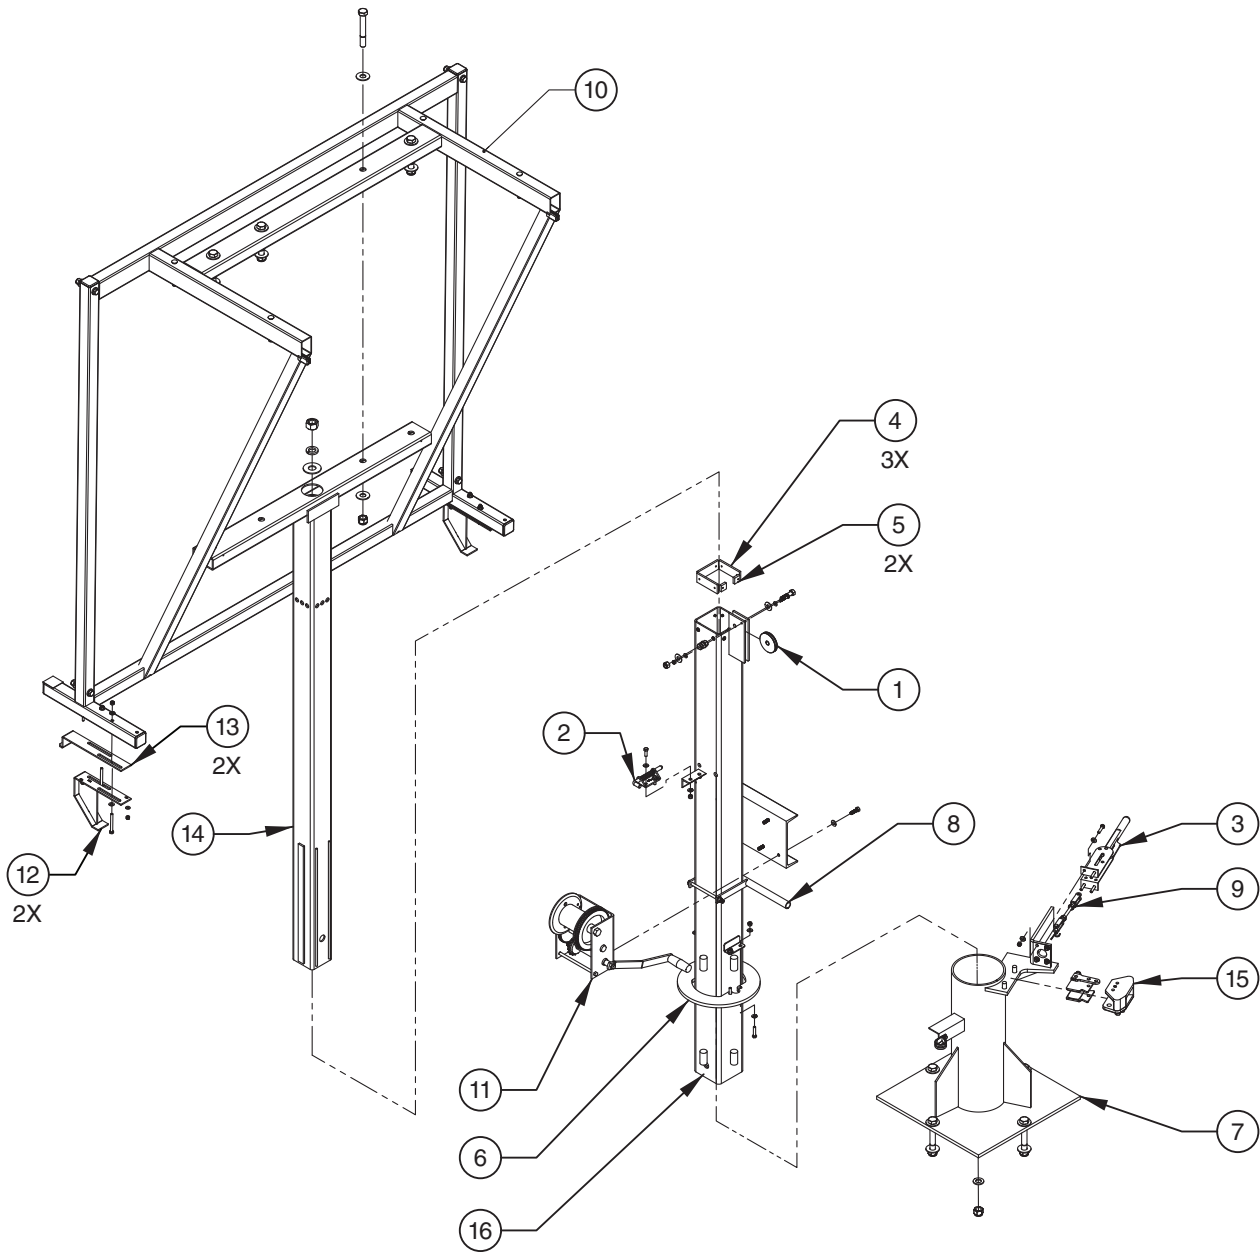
Parts drawing: Full-size tower assembly with hydraulic lift
